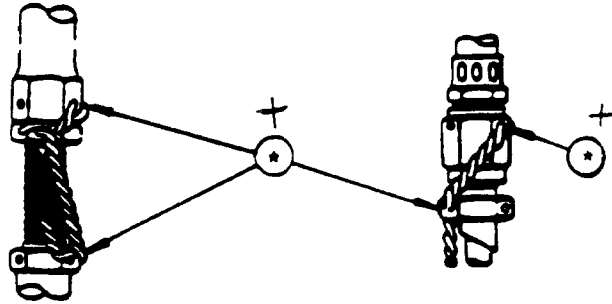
Correct method for wiring adjustable connecting rod.
